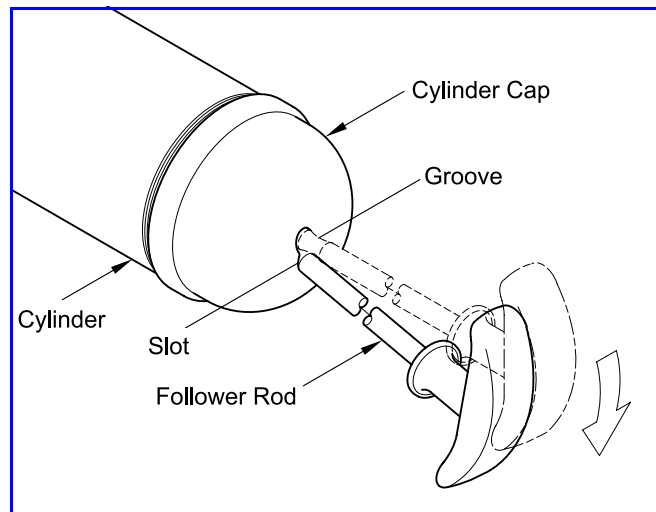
Follower Rod Engaged in Cylinder Cap Slot
